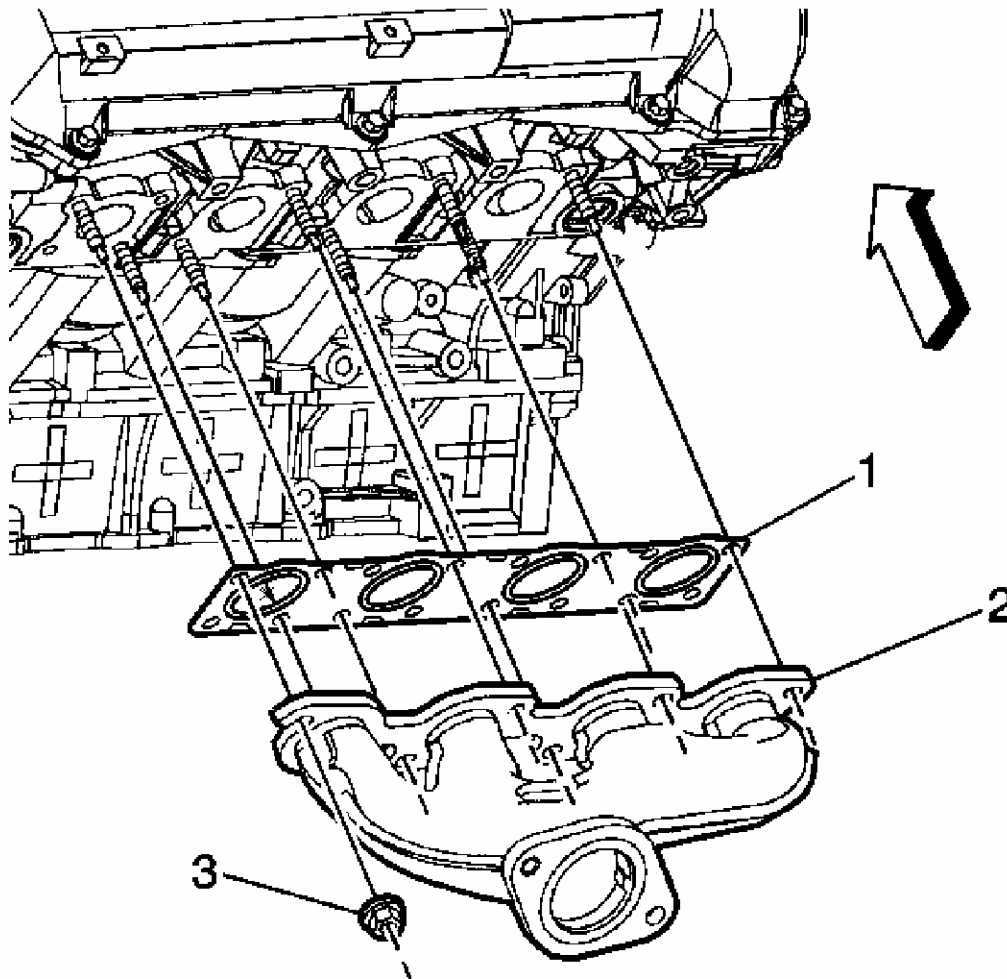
Identifying Right Exhaust Manifold Retaining Nuts
